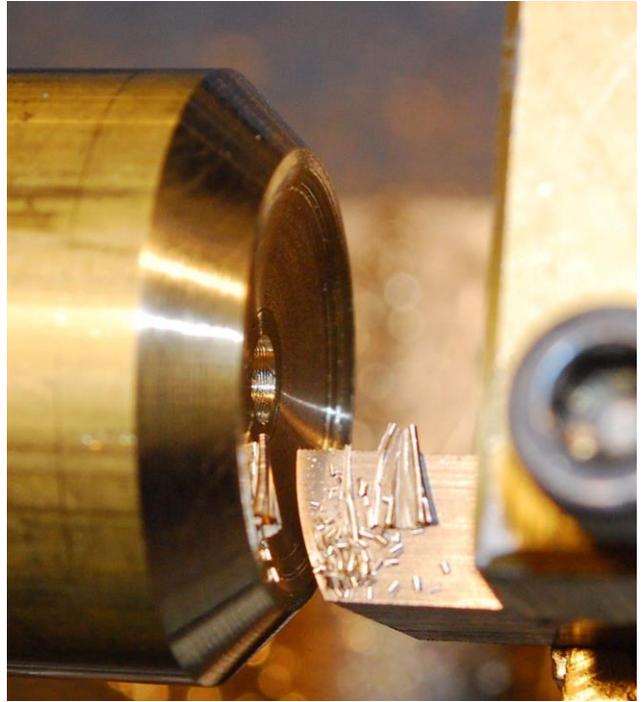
Finishing the inner curve with a profile tool. This cut has a little further to go until the inner curved surface meets the chamfer.
